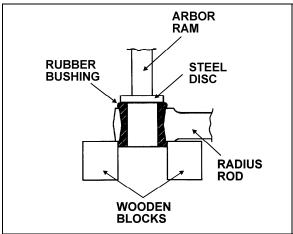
RADIUS ROD BUSHING REMOVAL
